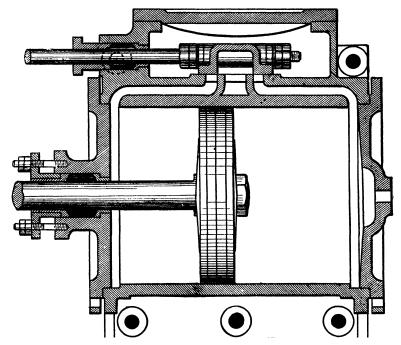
Cylinder of a Horizontal Steam-Engine.
